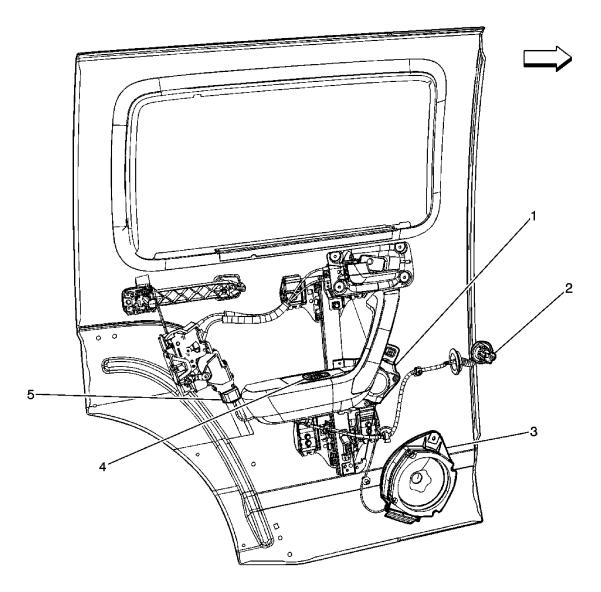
Identifying Left Rear Door Components (RR Similar) Courtesy of GENERAL MOTORS CORP.
